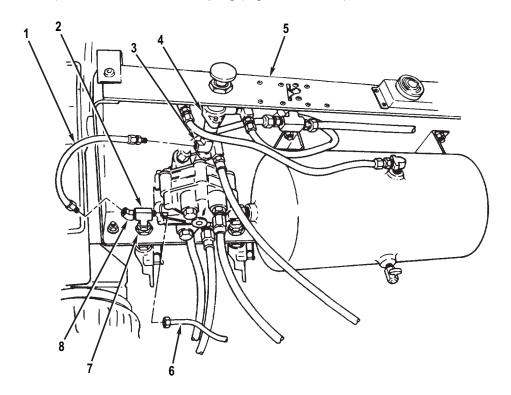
Airbrake Valve-to-Tee Tube Assembly Remplacement.
